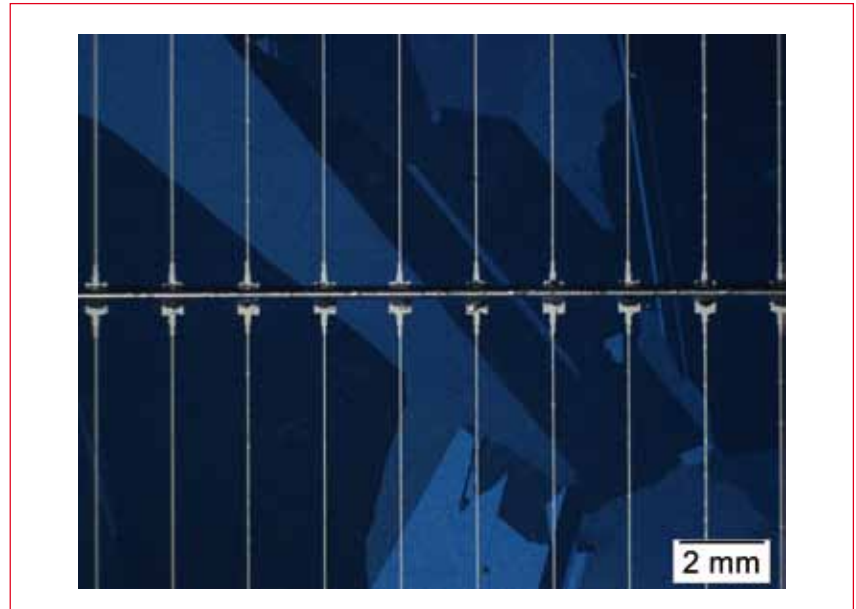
Ag-plated contacts: standard busbar-less design, with soldering pads on the grid fingers.
